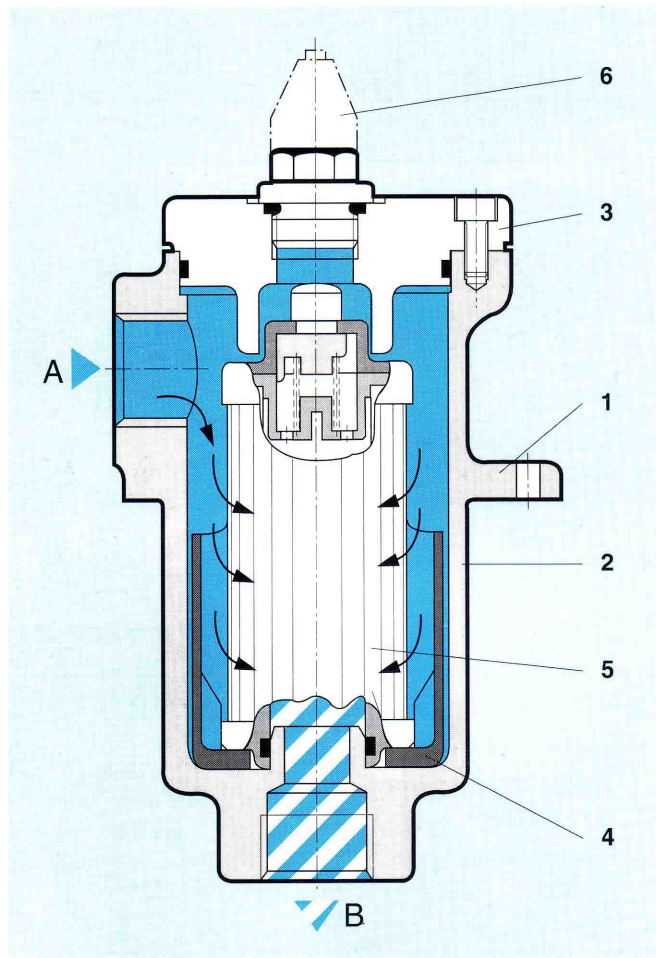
Sectional diagram of mounted return line filter for mounting in tank
